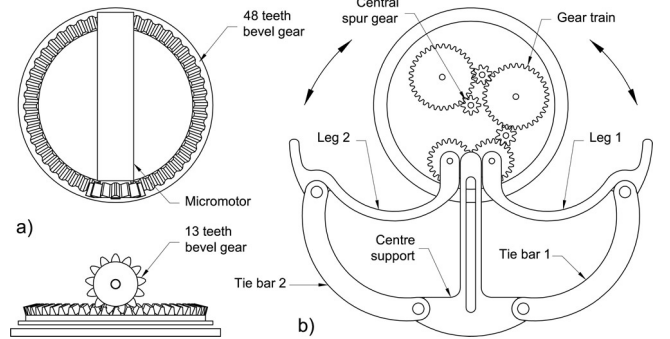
Holding mechanism design showing: a) 13 teeth and 48 teeth bevel gears set, b) gear train and legs in the fully extended position. The central spur gear is driven by the 48 teeth bevel gear.
